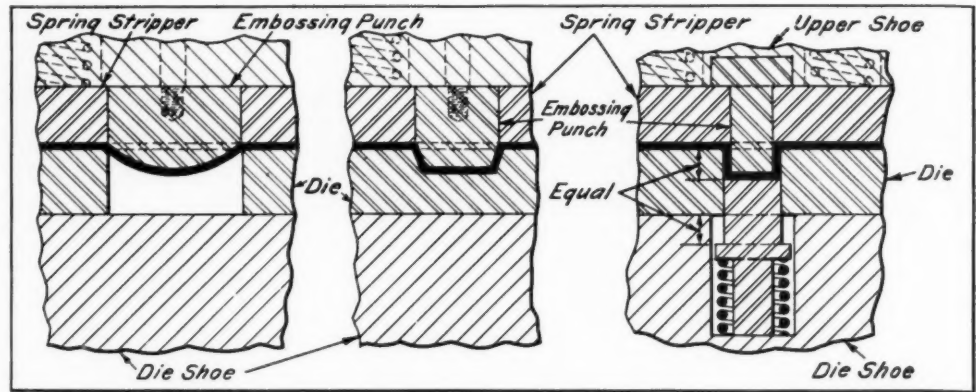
Die Designs for Different Kinds of Embossed Parts
